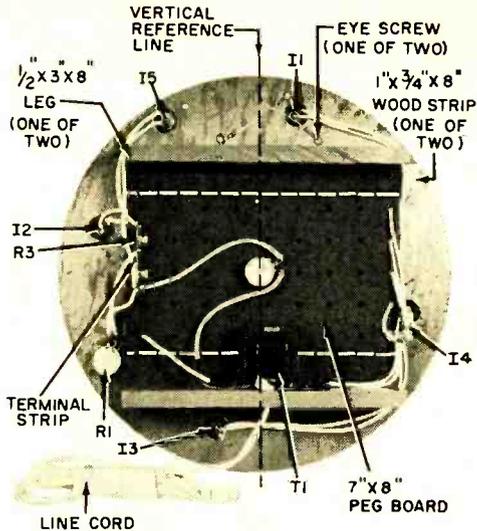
Mount the pegboard assembly on the back of the disc as shown. The wiring is done later.
